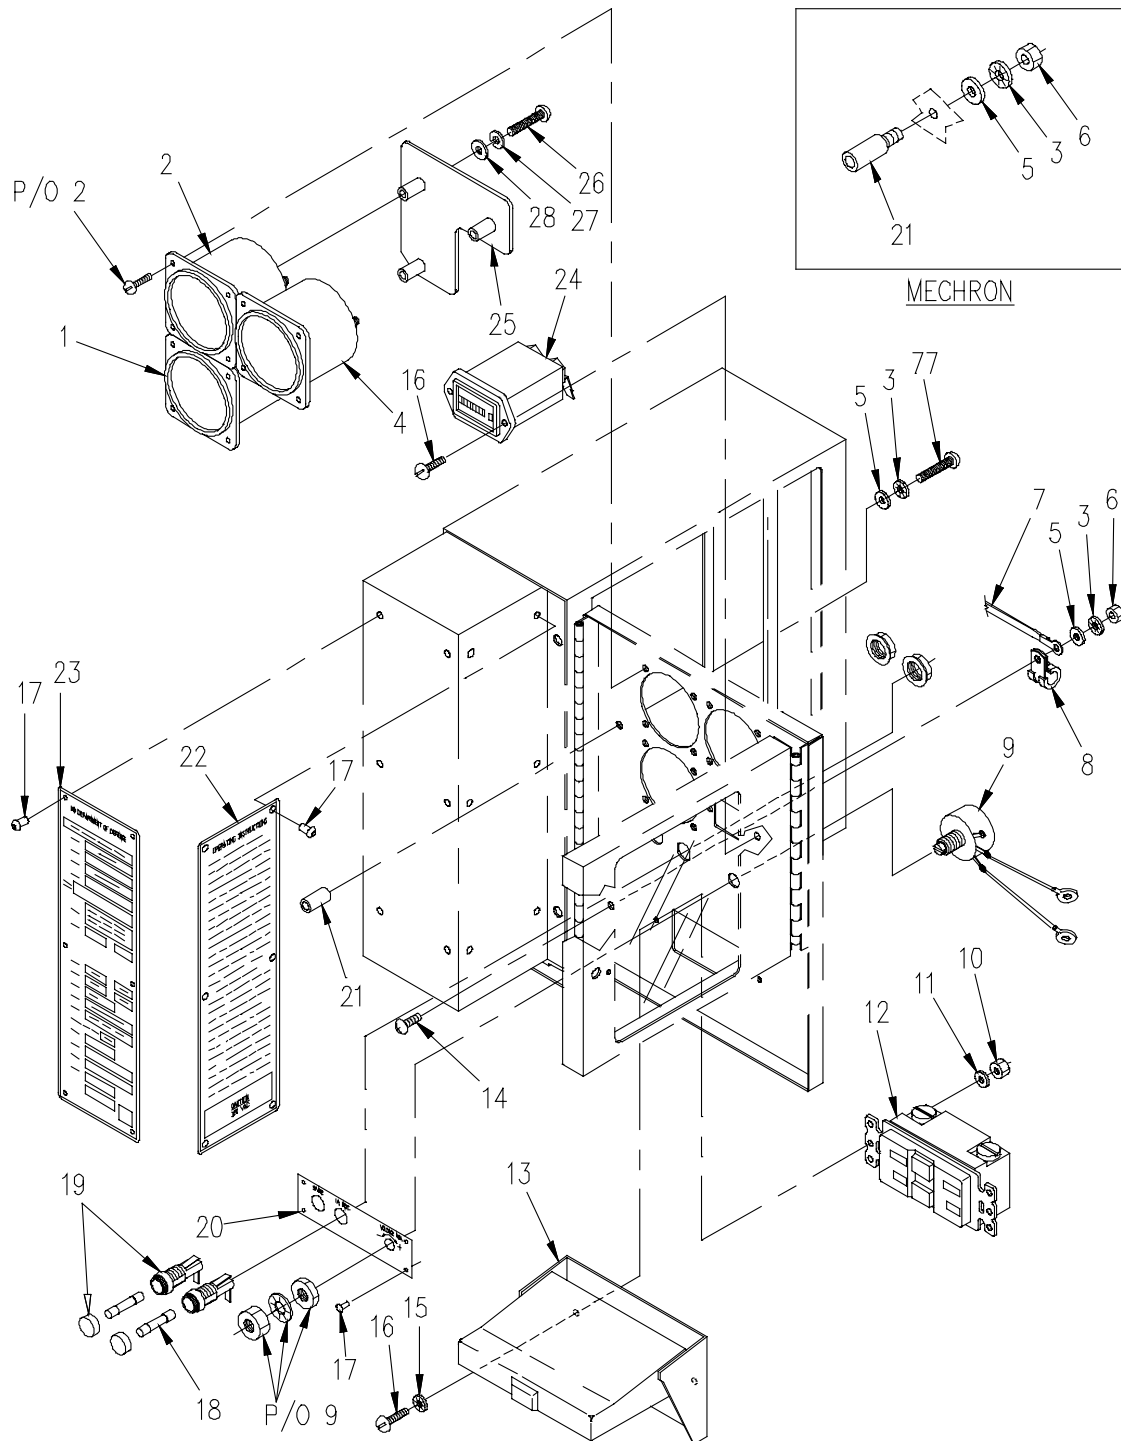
Control Panel Assembly (MEP-531A) (Sheet 1 of 3)
